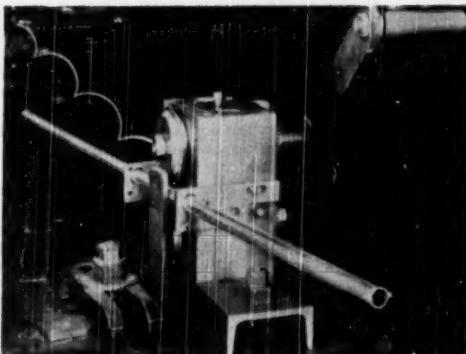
MACHINE FOR MAKING SEAM WELD; TRIMMED METAL CAN BE SEEN CURLING AWAY.
